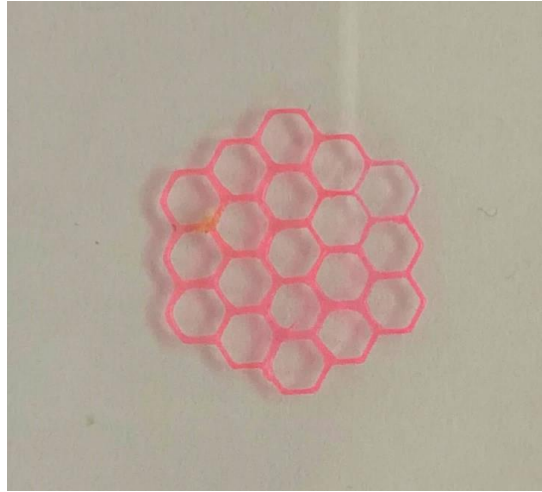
Photograph of the 3mm dimension honeycomb-like structure.
